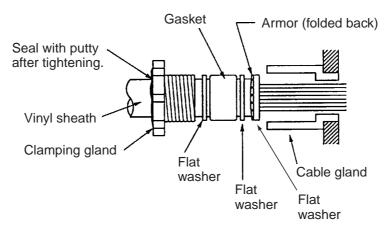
Passing clamping gland, washers and gasket on the multicore cable
